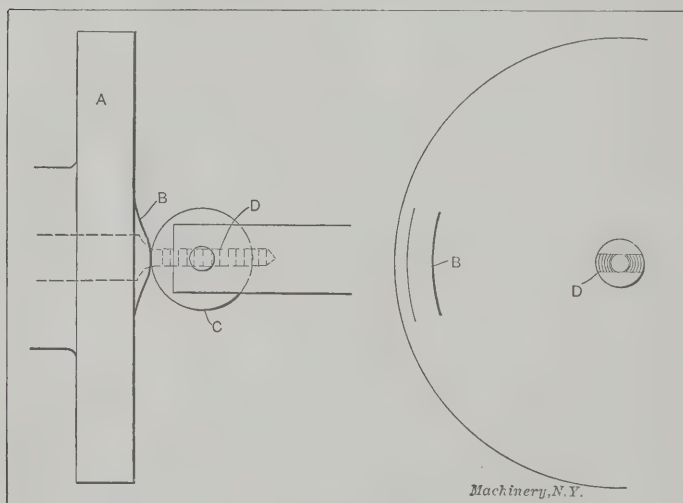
Diagrammatical View of Special Lathe Attachment used for Backing Off the Reamer Teeth
